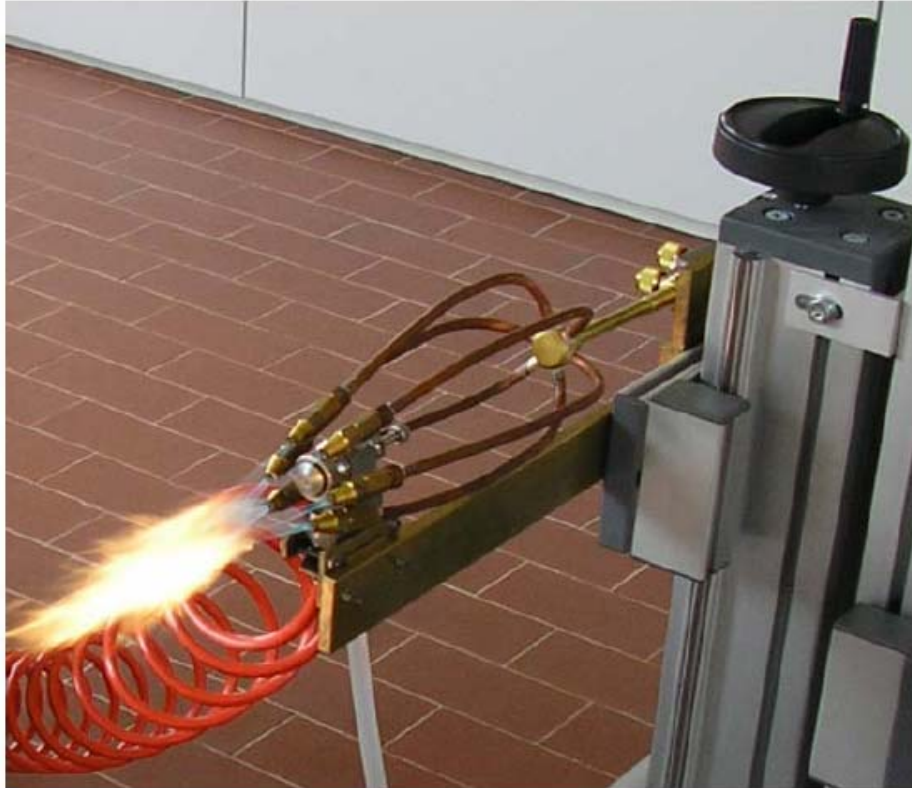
Detail of the Flame spraying equipment with the burning set and atomizing nozzle.
